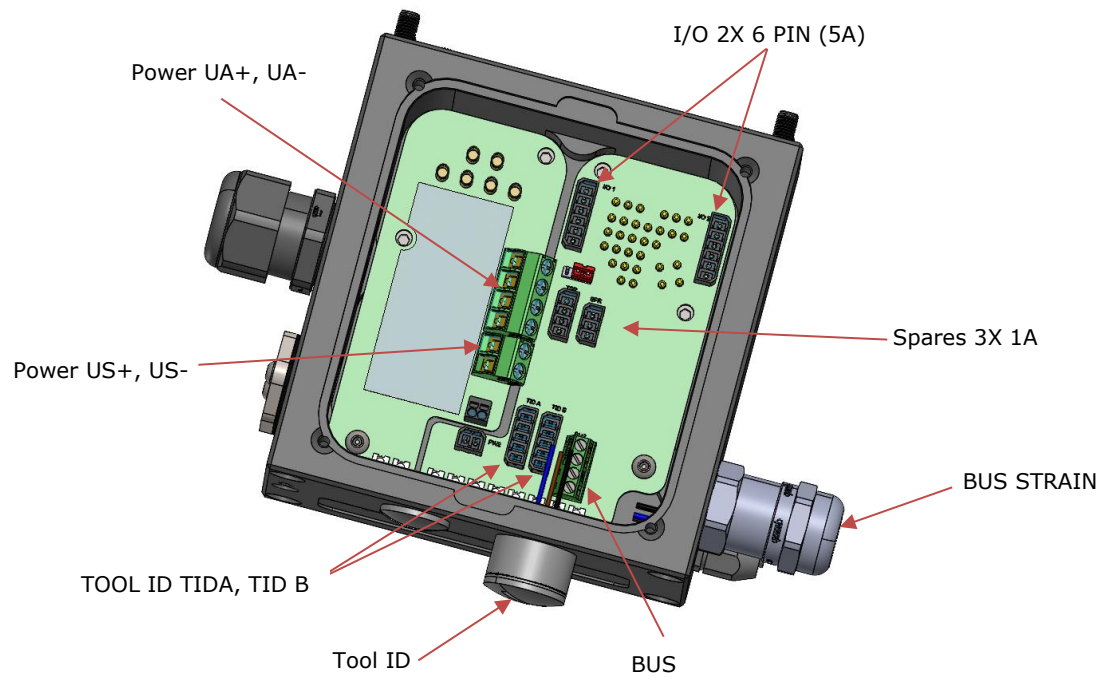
Cable Replacement Terminals (Tool Side)
